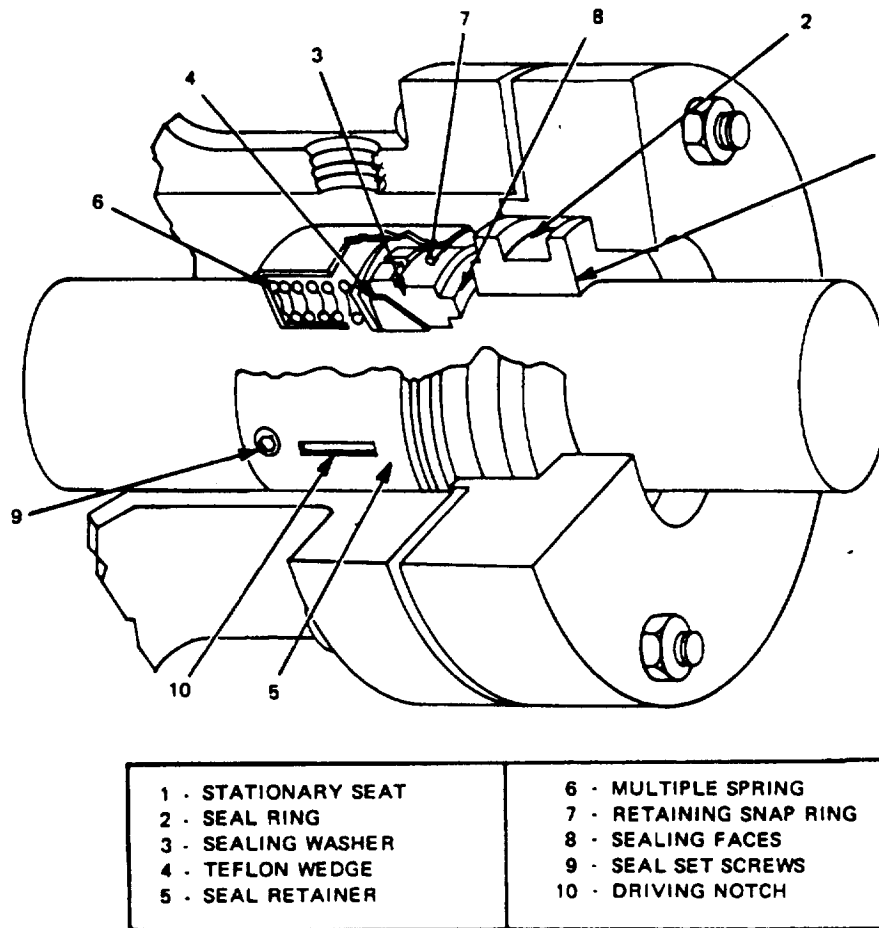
Mechanical Shaft Seal for Screw 6DBX-156 Series Pump
